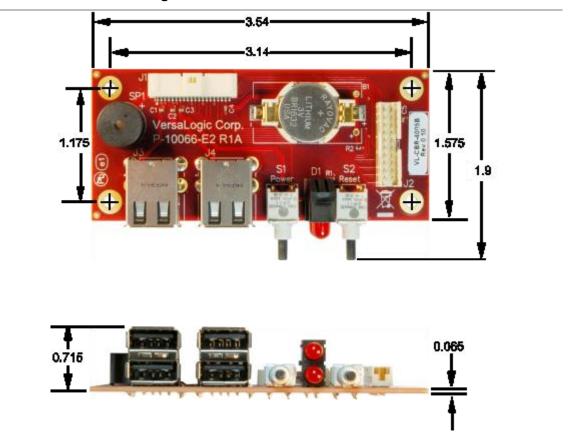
VL-CBR-4005B Dimensions and Mounting Holes
